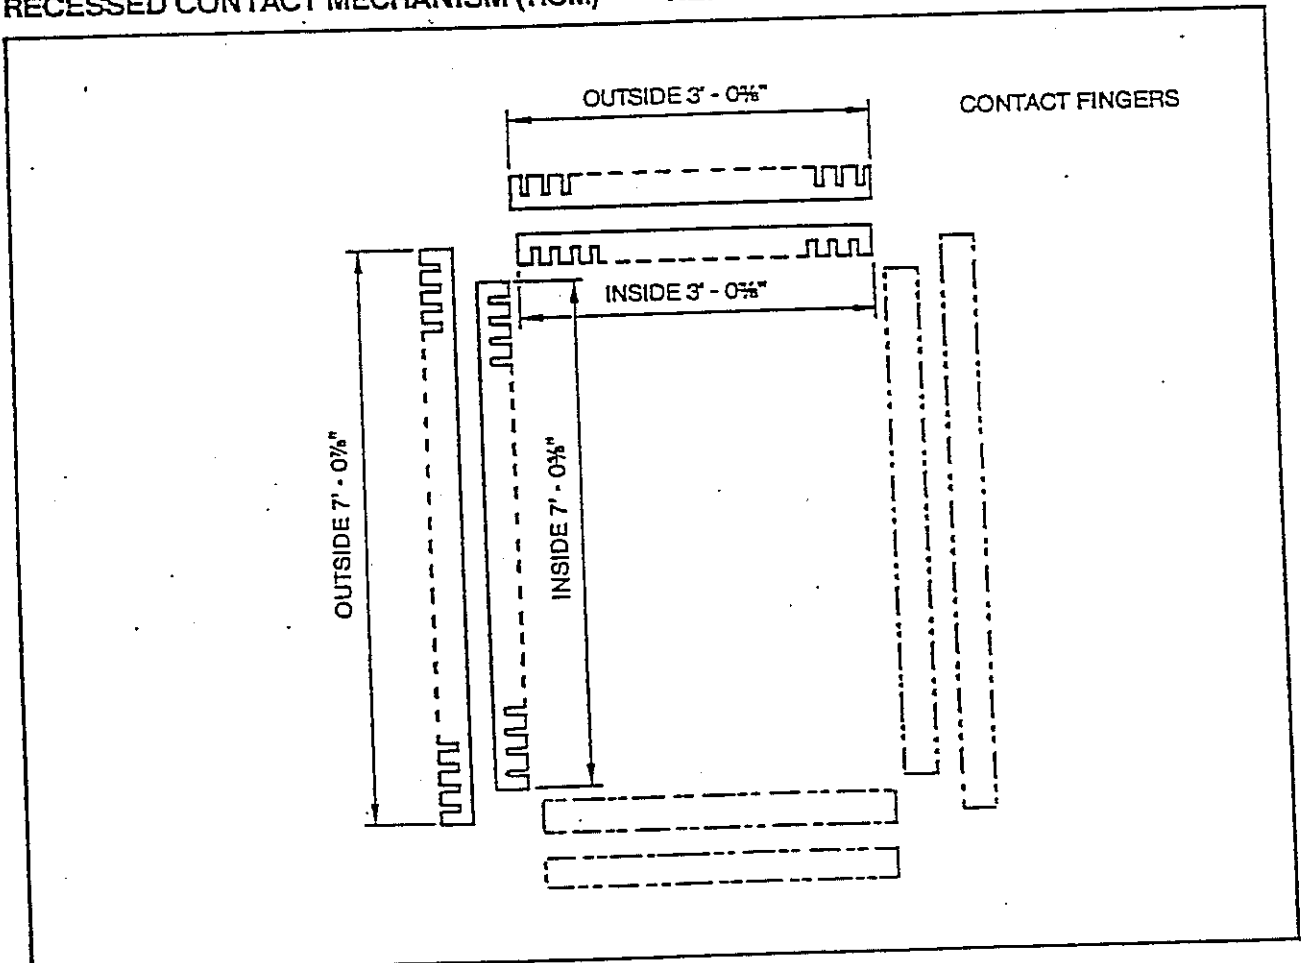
FINGERSTOCK SIZE LAYOUT
